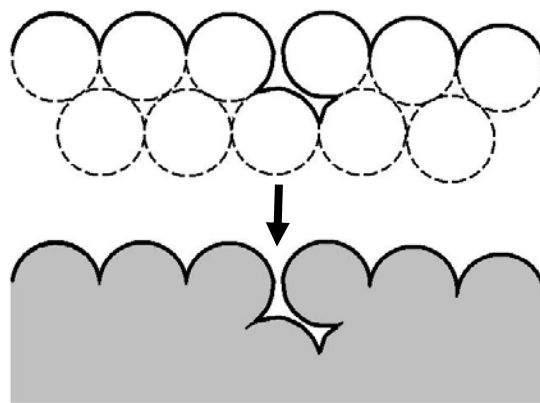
Schematic of as-cast surface of lost-foam casting. Top: surface of foam pattern (foam beads shown with dotted line). Bottom: resulting surface of metal casting.
